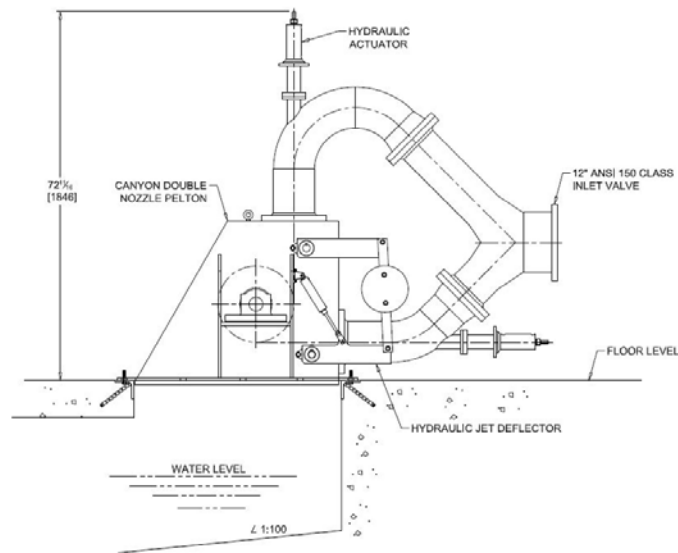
Manufacturer's Schematic-Pelton Wheel Turbine
